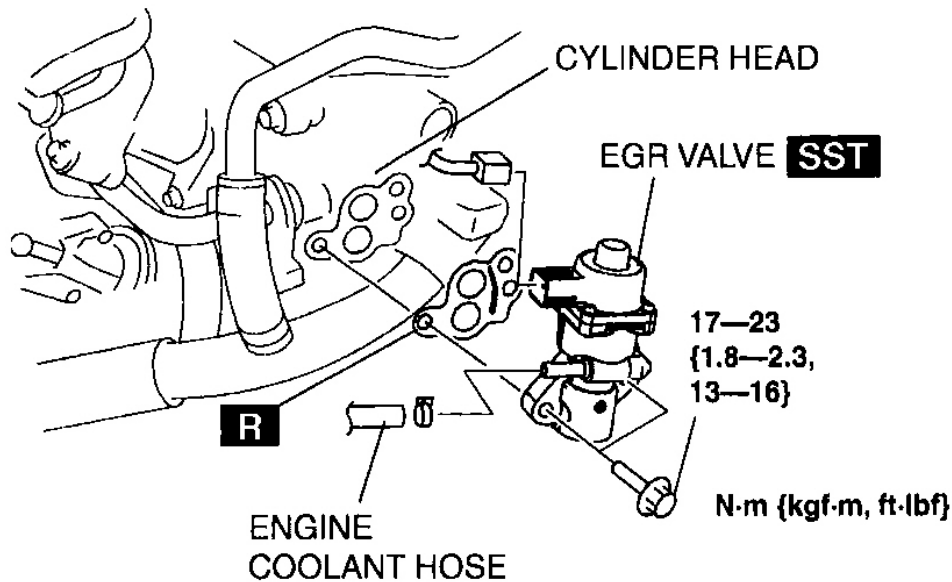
Setting SST (49 N013 001) To EGR Valve Installation Bolt
